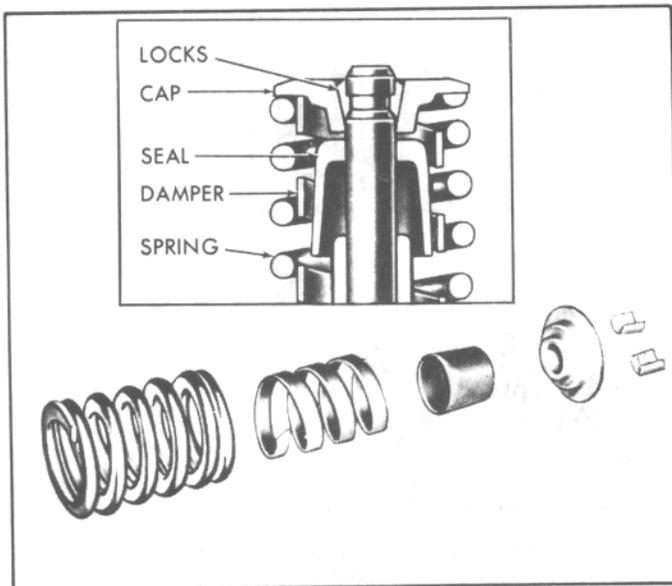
Exhaust Valve Spring Installation (454 CID V8)
